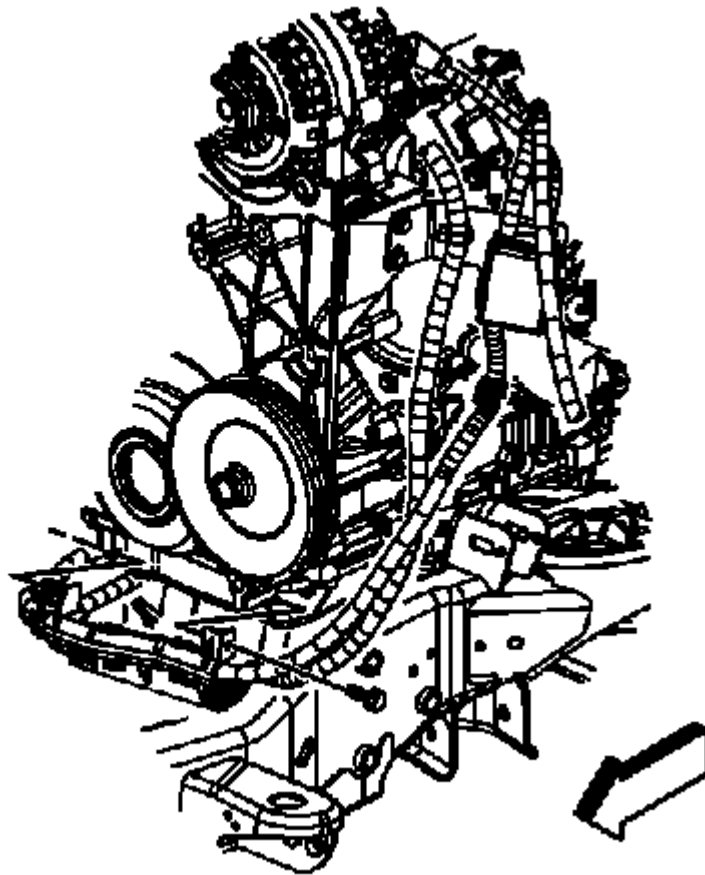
View Of Positive Battery Cable, Channel & Bolt
